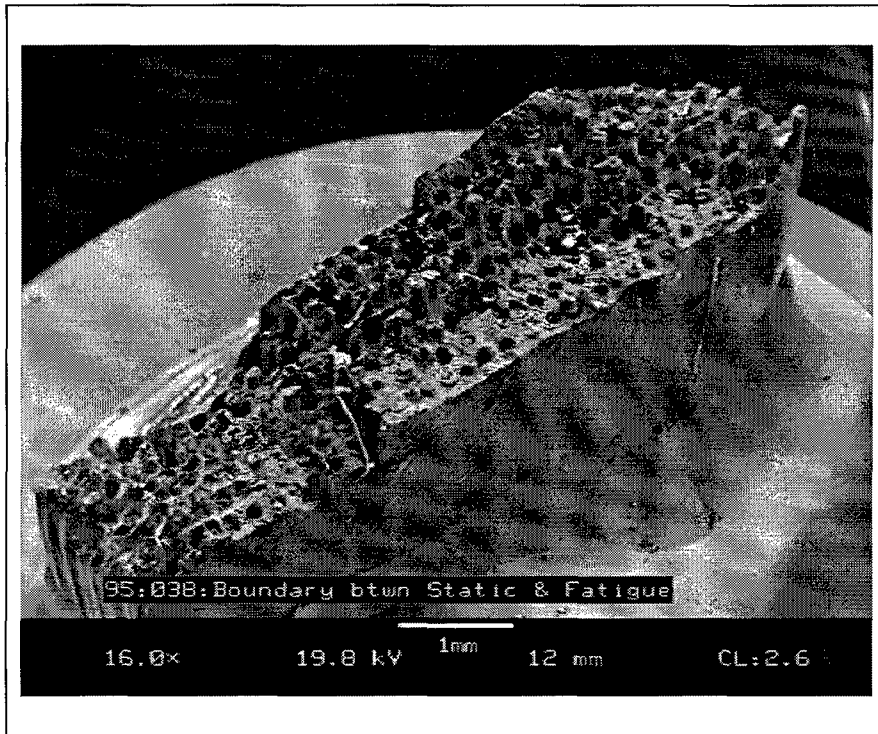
Fracture Surface of the R.S. Test at 26% of the Life
